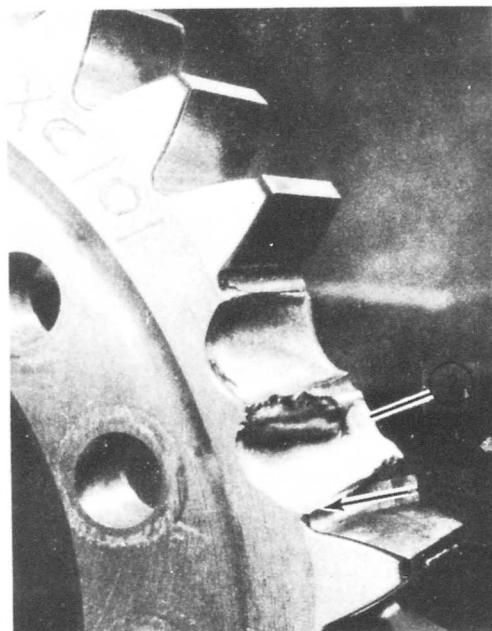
Fracture Surface of Second Tooth Failure. Arrow Indicates Origin Location in Drive Root Fillet Area.
